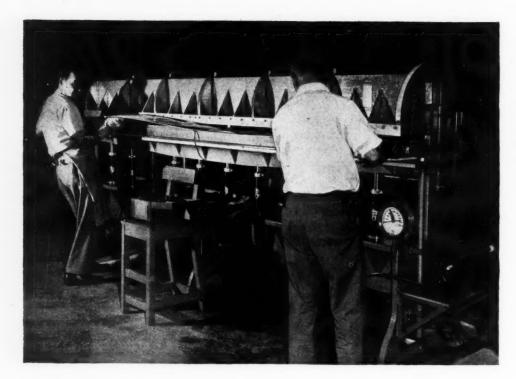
Special Press Consisting of a C-frame, Hydraulic Jacks, and an Electrical Heater, Used for Bonding Stainless Steel to Wood
